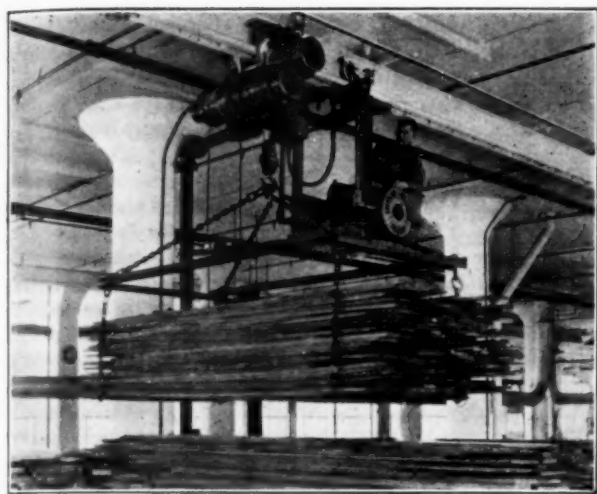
THREE-TON MONORAIL CARRIER HANDLING PACKAGES OF PLANED LUMBER TO STORAGE AND TO CUTTING BENCHES
